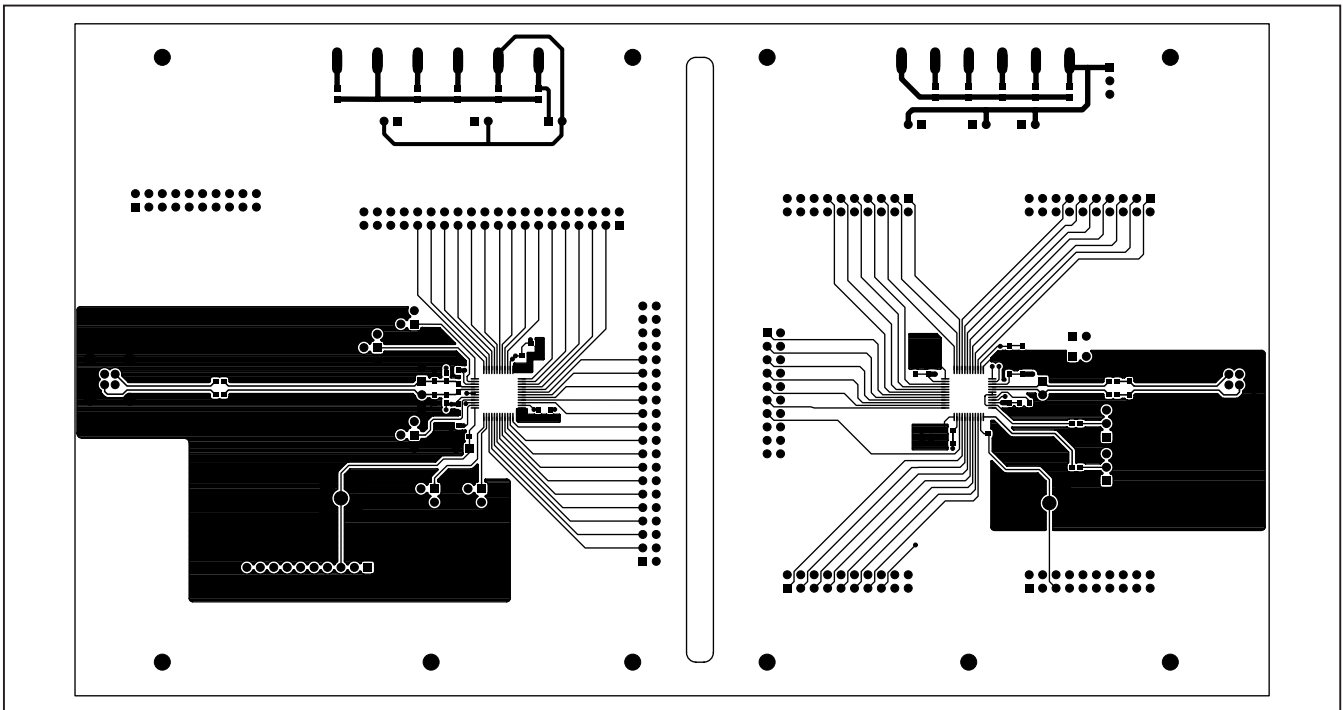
MAX9217/MAX9218 EV Kit PCB Layout—Component Side
